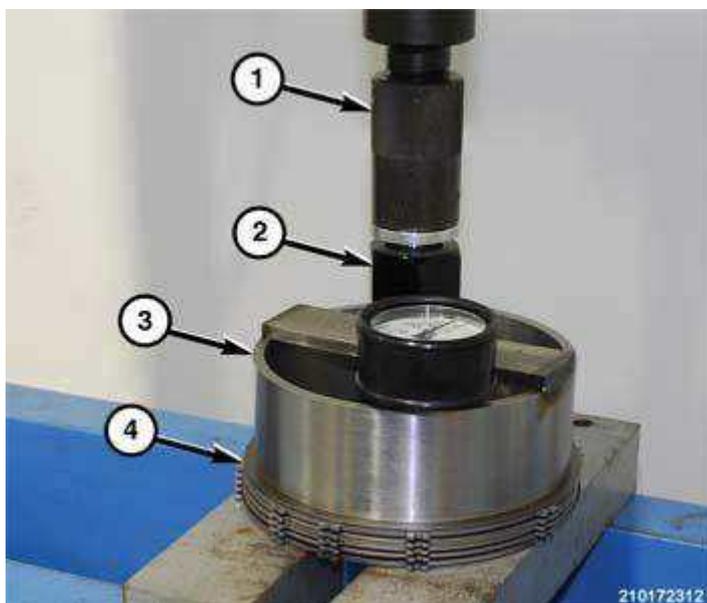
2-6 Brake Wave Plate, Arbor Press & Tools 10427 & 10429
